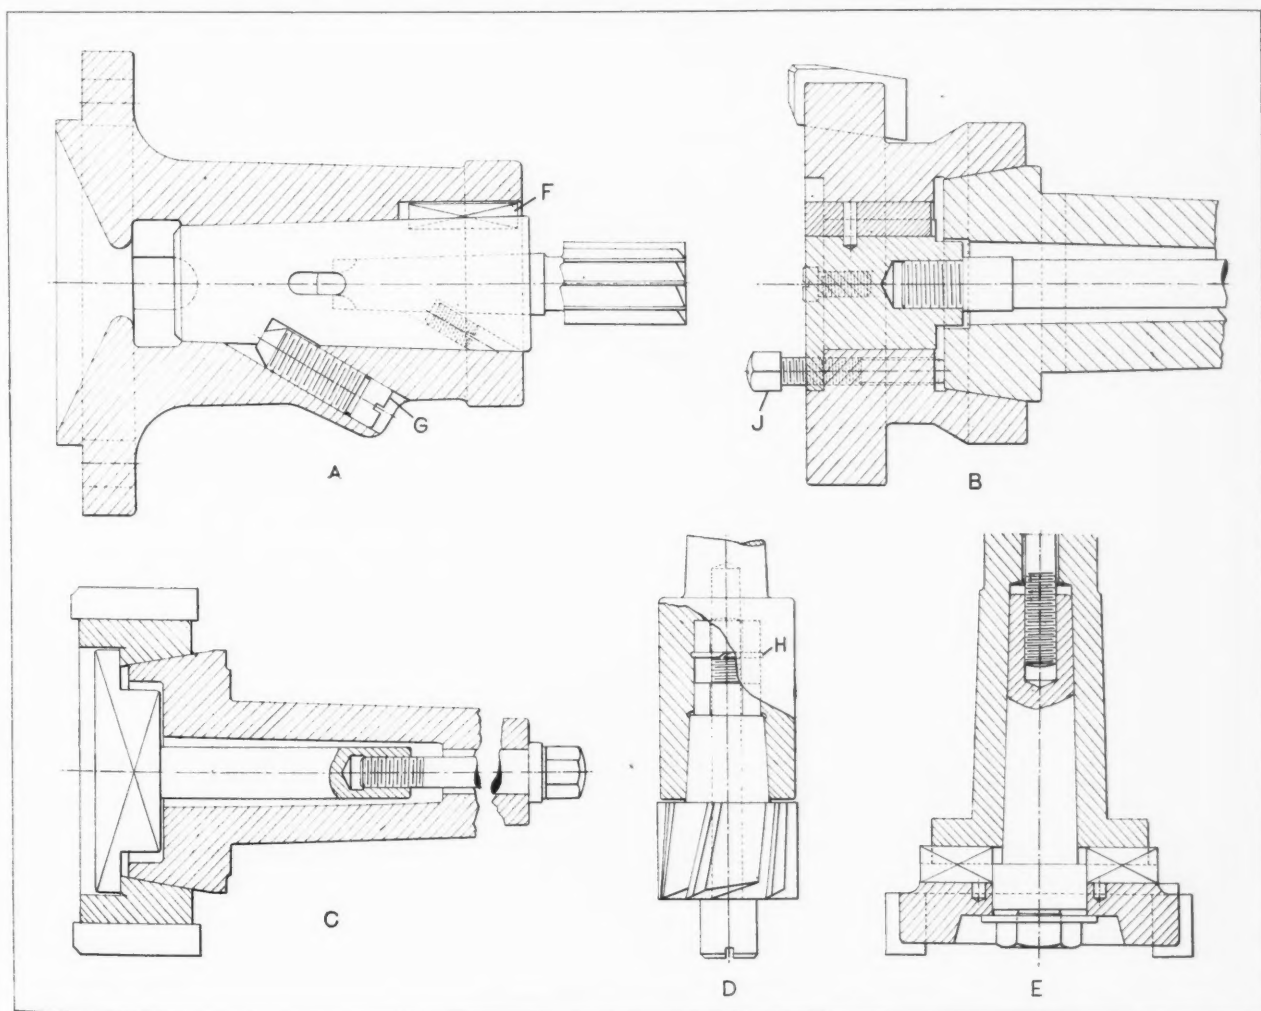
Holders of Taper Nose and Clutch Drive Types
